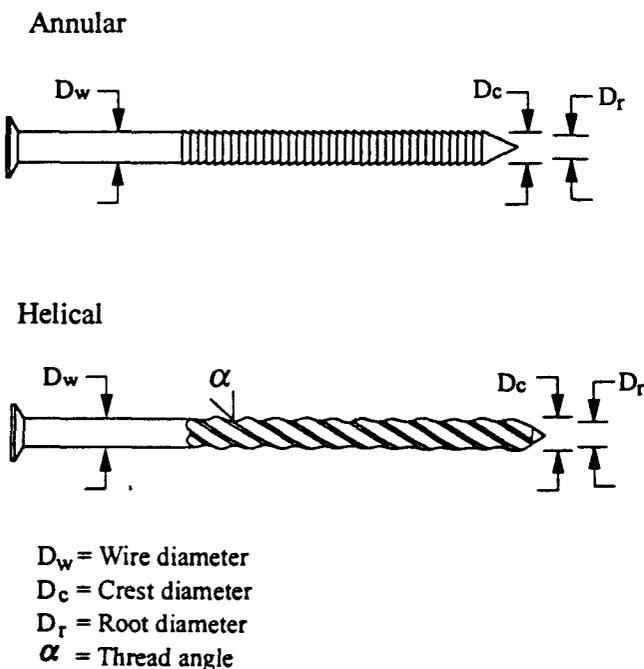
Dimensions of helical threaded-shank and annular threaded-shank nails. Thread expansions are equal to thread depressions for helical threads, therefore the effective wire diameter remains the same. However, with annular threads the effective diameter (root diameter) is less than the initial wire diameter.
